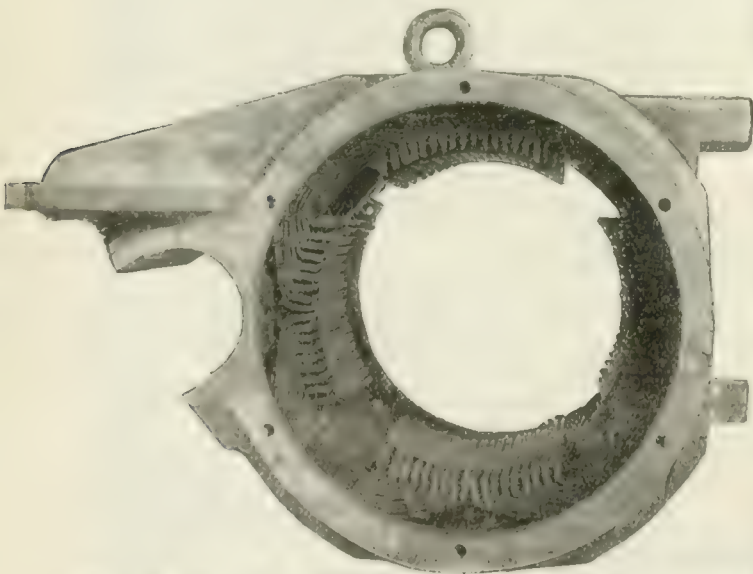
STATOR OF 100 H.P. WESTINGHOUSE SINGLE-PHASE MOTOR, SHOWING SLOTS INTO WHICH COMMUTATING COILS WILL BE INSERTED.
